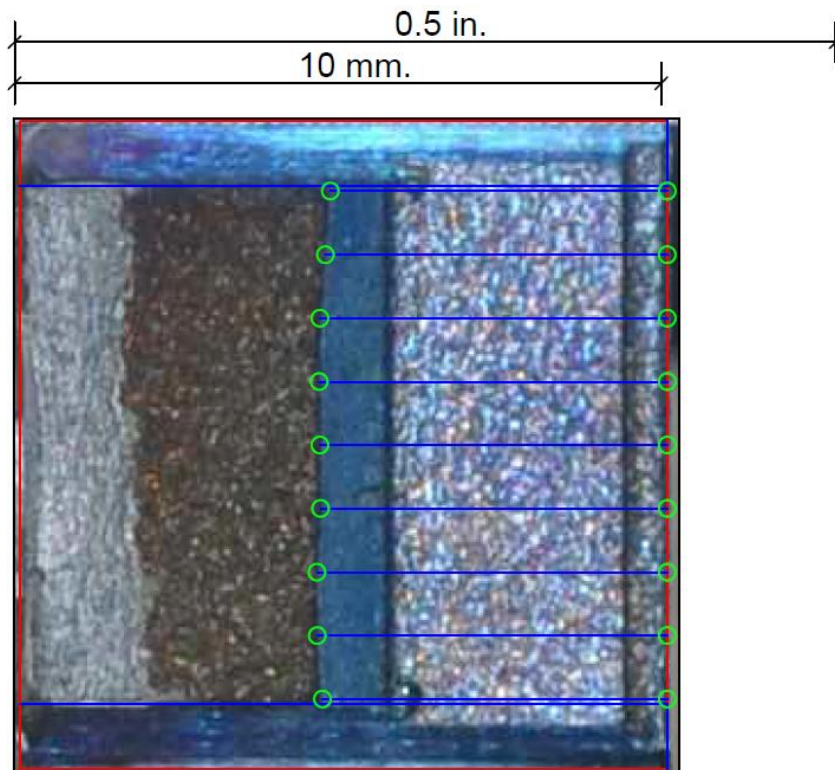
Specimen D20' Fracture Surface
